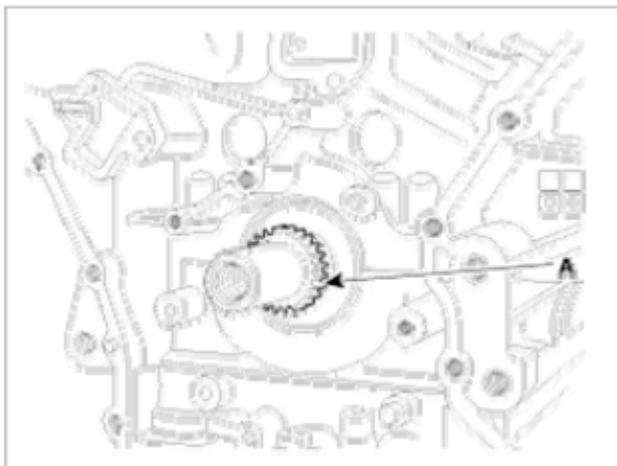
Locating Crankshaft Sprocket (LH Camshaft Drive)
